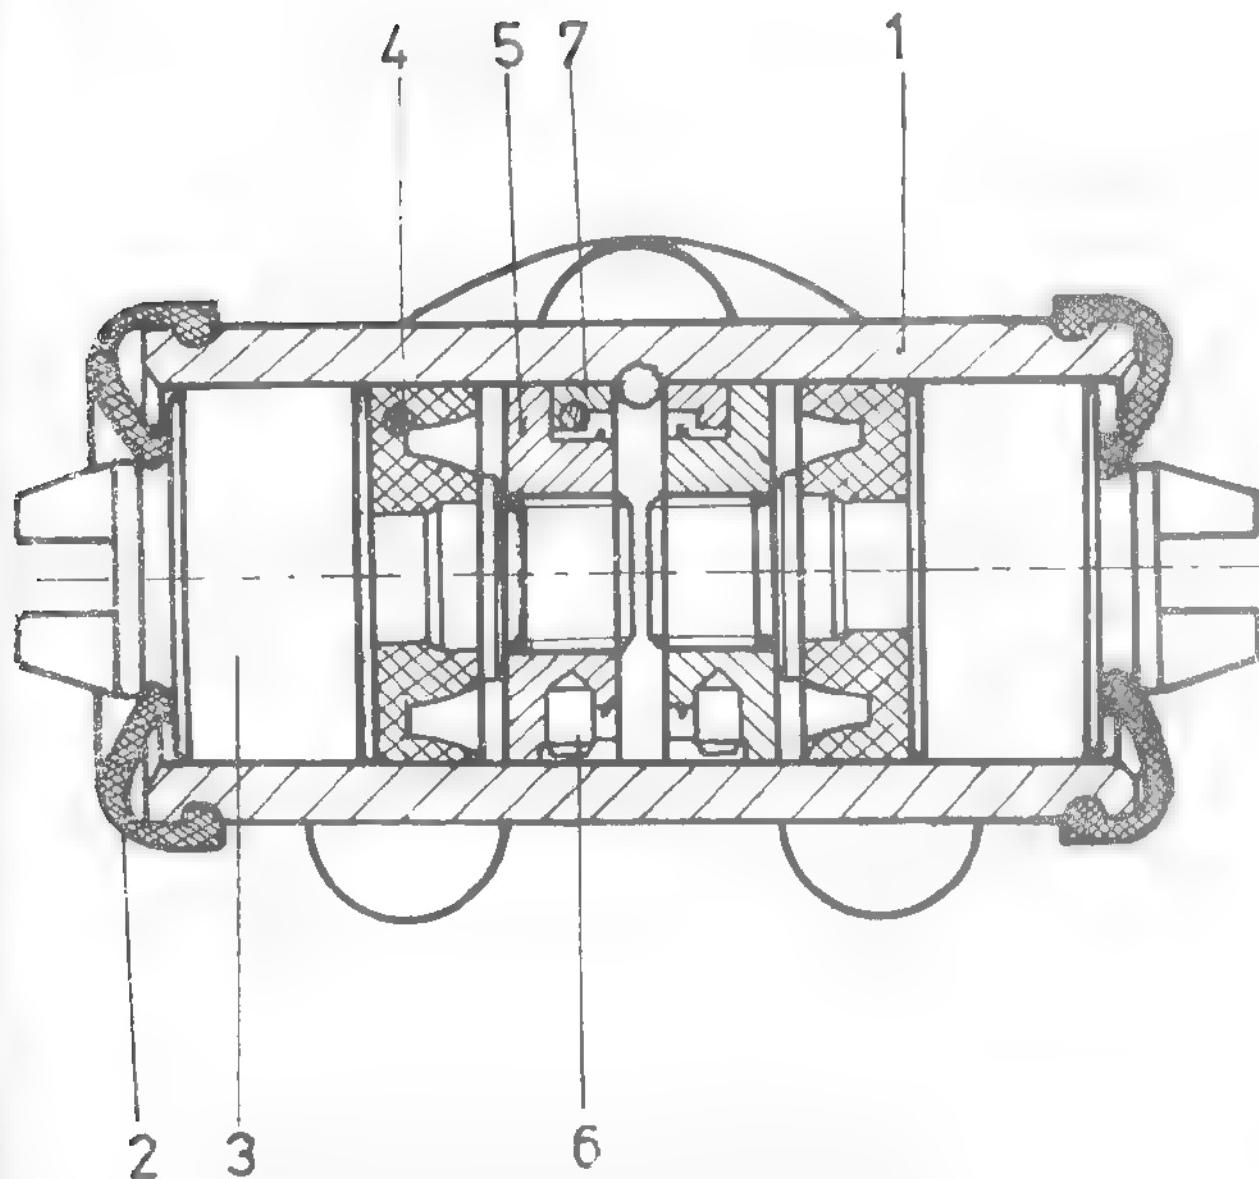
REAR WHEEL BRAKE CYLINDER
